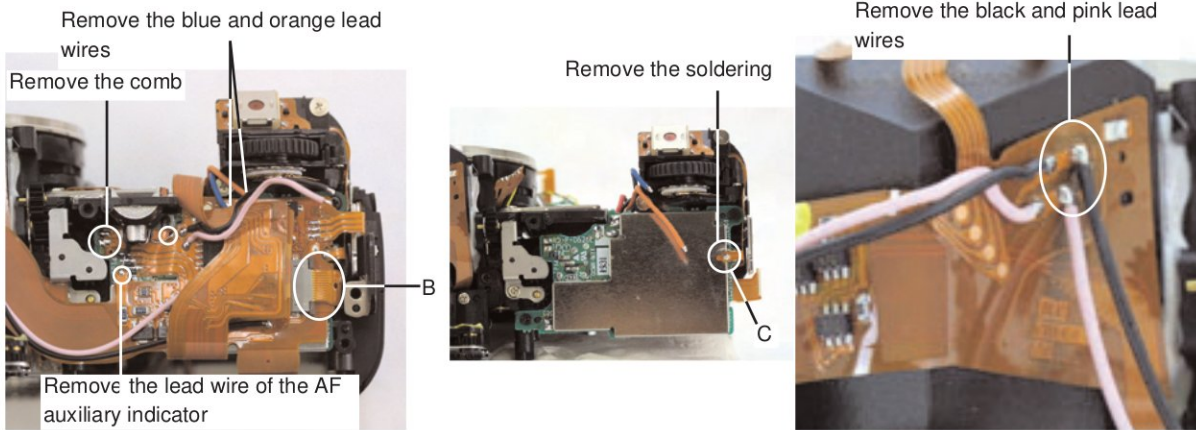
DC/DC PCB, MD FPC, AF auxiliary indicator
